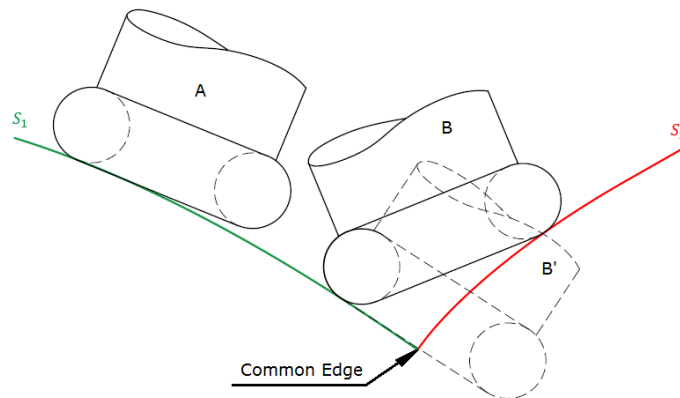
A toroidal end mill in moving across the common edge of two intersecting surfaces using the DTM algorithm [5]. The tool position marked as A is a multipoint tool position on triangulated surface S_1 ; the tool position marked as B' is the expected five-axis tool positioning on surface S_1 in case surface S_2 is not present. The tool is lifted as shown by position marked B when surface S_2 is present.
